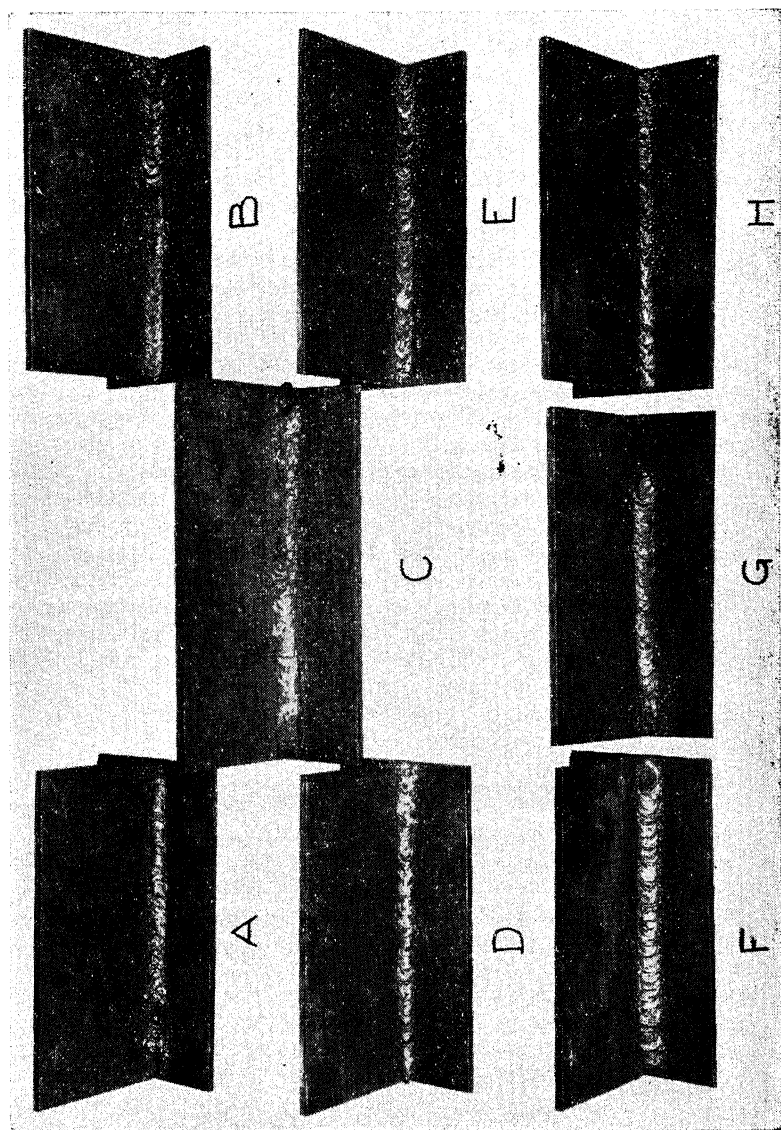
Fillet weld specimens made with bare electrode. See table on page 128 for explanation.
